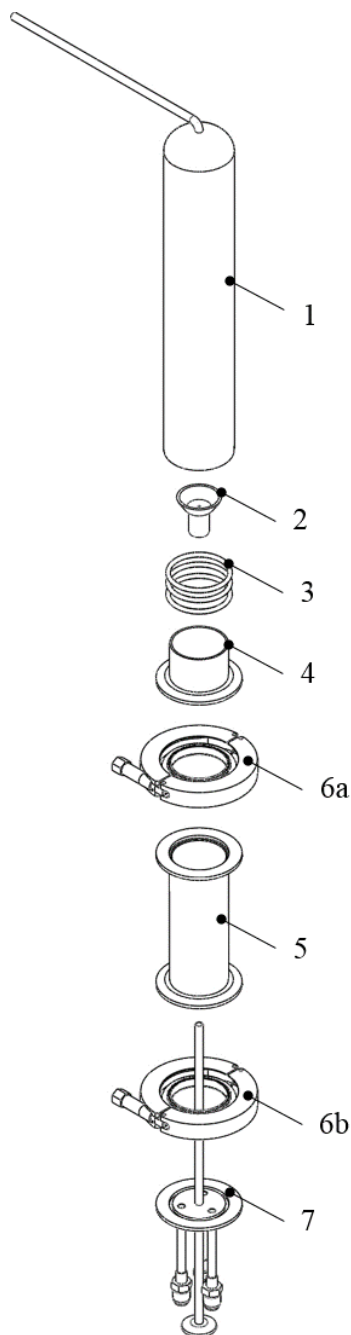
Exploded wireframe view of the upward flow reactor with (1) domed quartz tube, (2) alumina crucible, (3) o-rings, (4) stainless steel adapter, (5) stainless steel body, (6) cast clamps, and (7) gas/thermocouple feedthrough.
